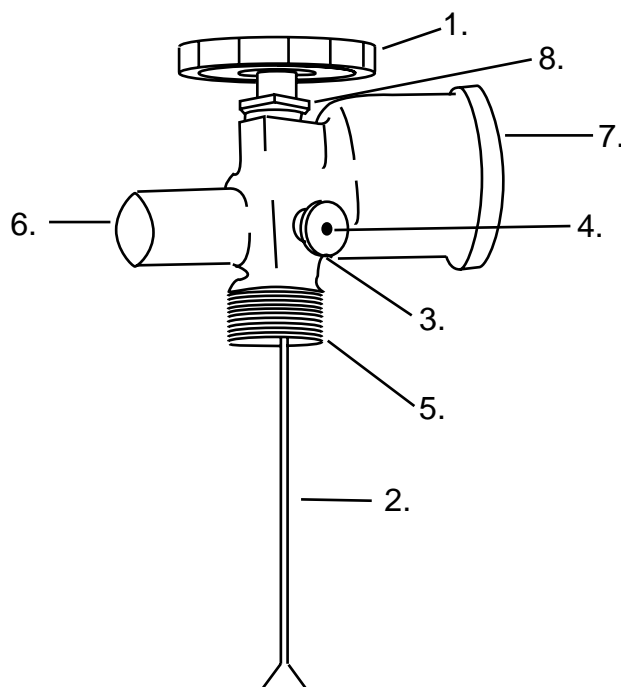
Old Style Shutoff Valve Assembly with POL connection and w/o OPD
